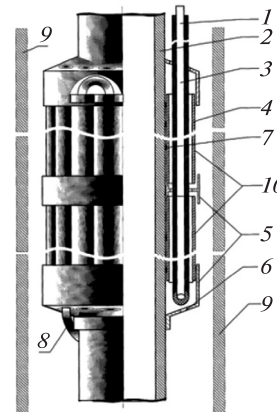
The well inductive heater of construction by Ufa scientific and research, projecting and engineering center “Nafto-gas–2”:
